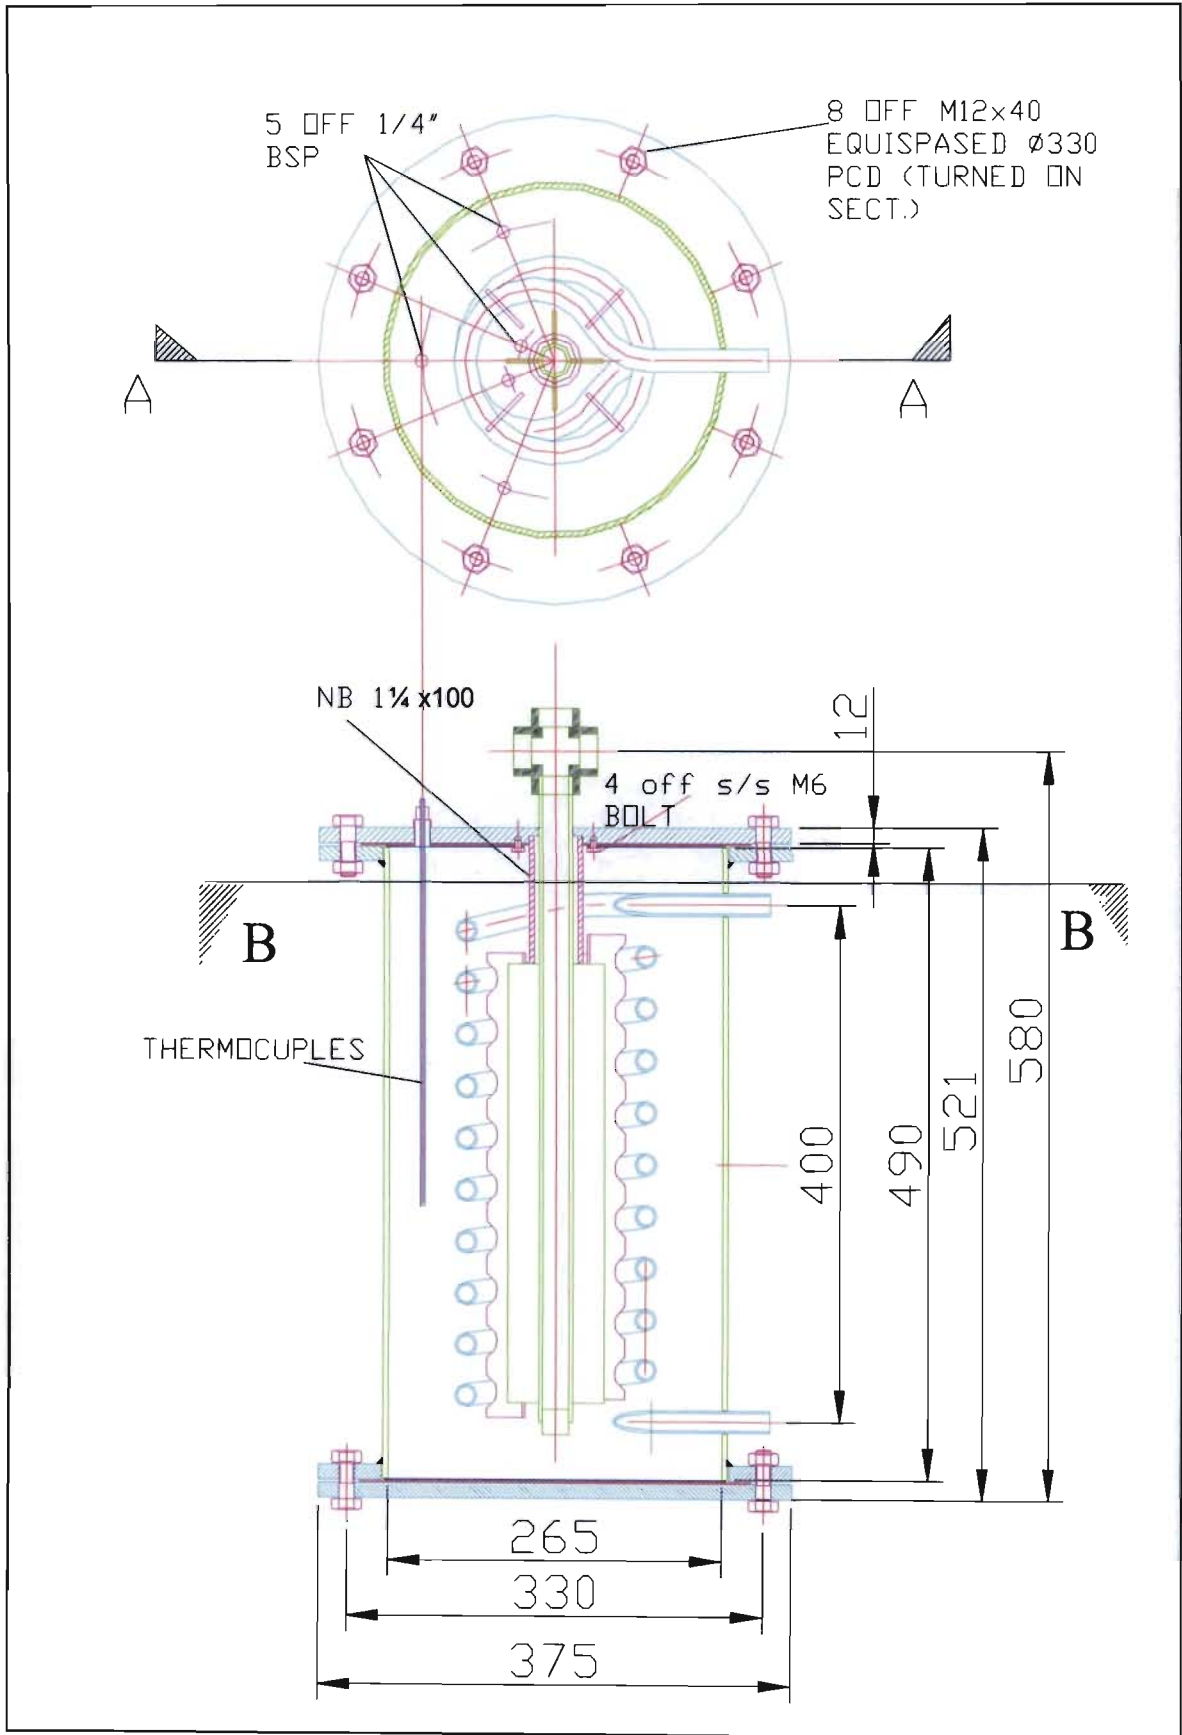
Details Drawing Design of Second Heat Storage Calorimeter
